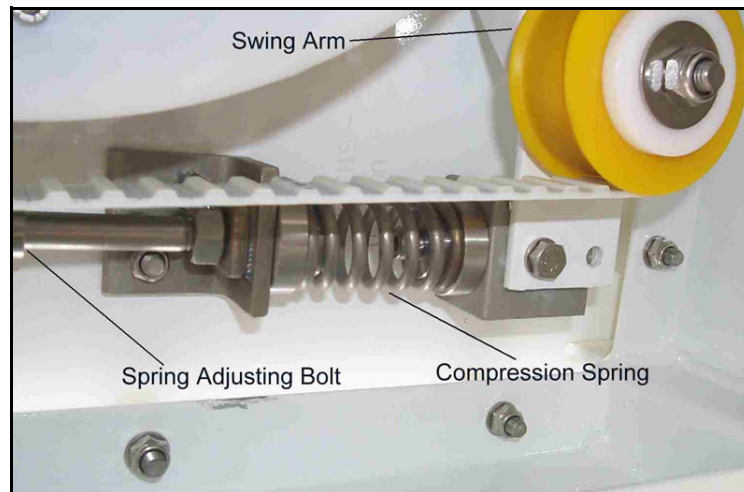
Sheave Wheel Belt Spring Adjusting Bolt
